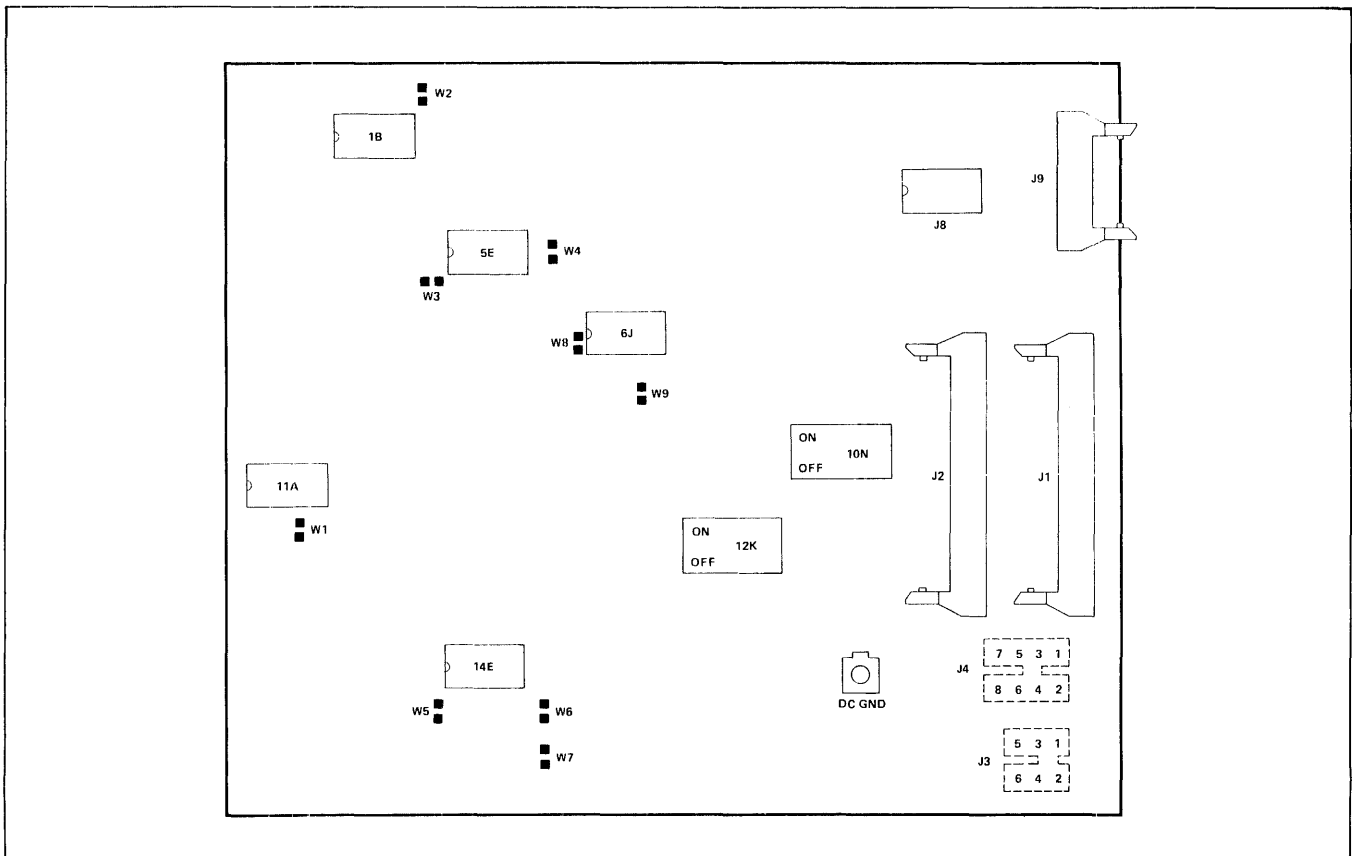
DIP Switch and Jumper Locations for PCB Assembly 200088
